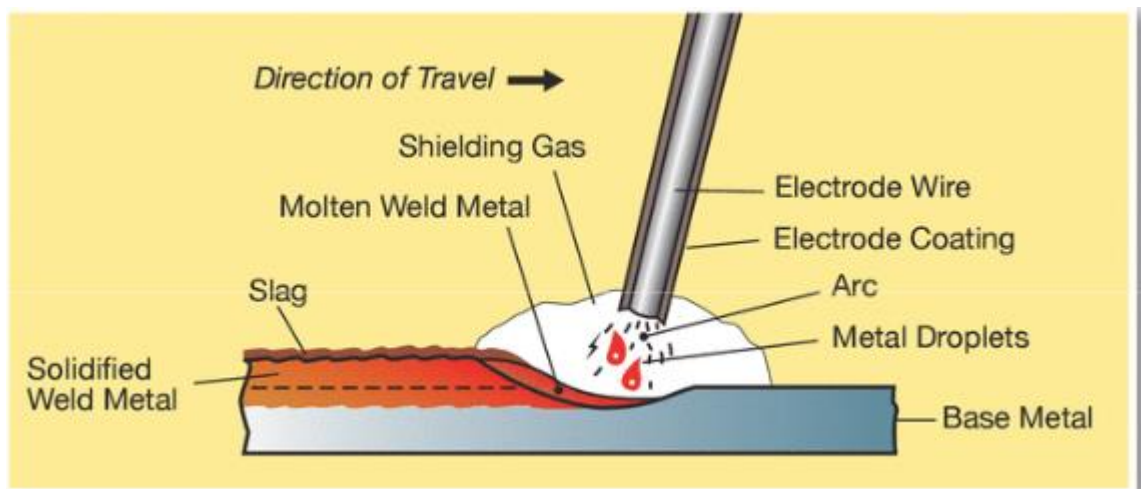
Stick welding process (Hobart Institute of Welding Technology 2012, p.1).
